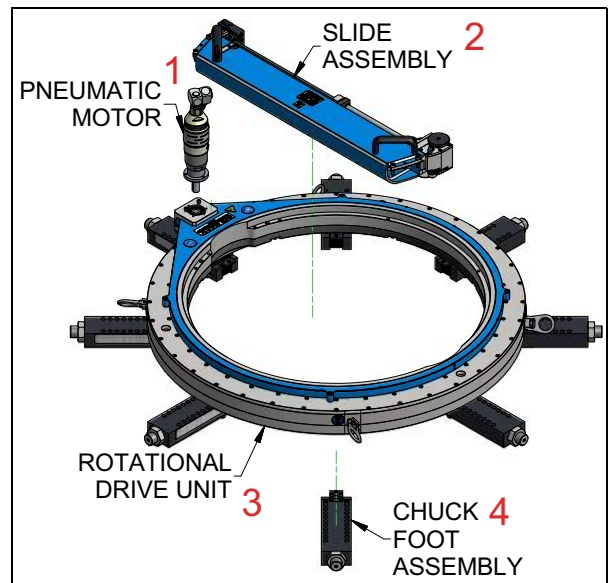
FF3600 PRINCIPAL COMPONENTS
